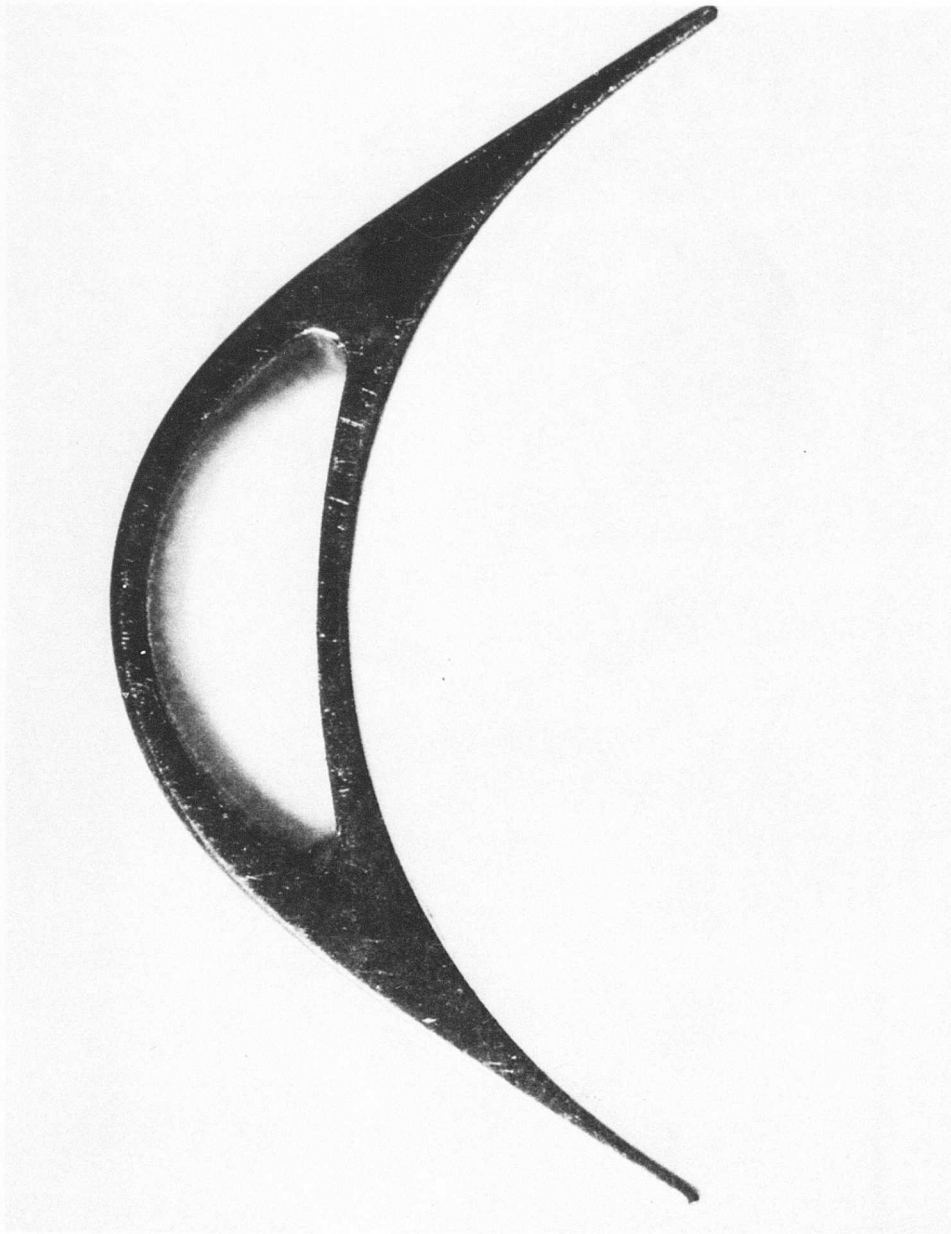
Hollow Titanium Blades Manufactured by Removing Center Material by Electric Discharge Machining.
